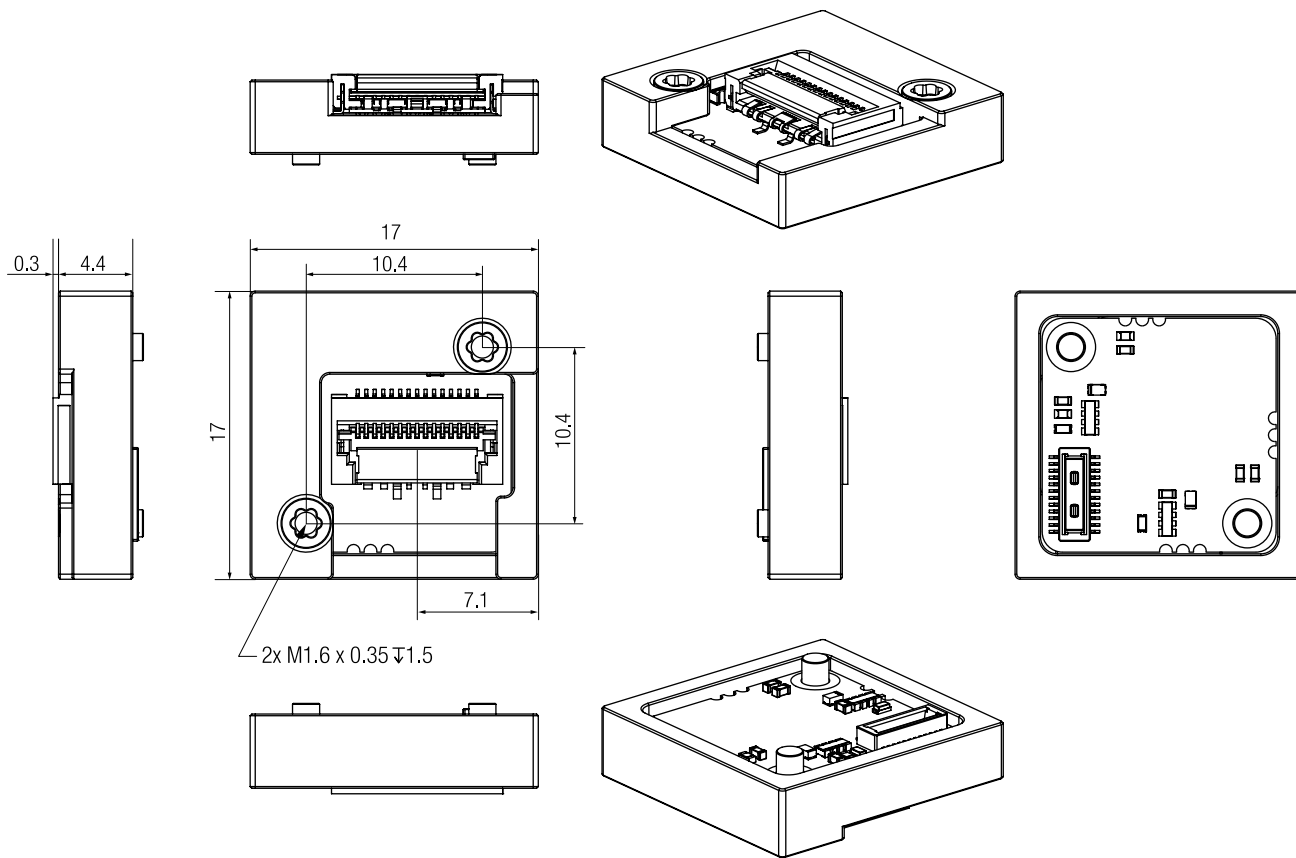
Dimensional drawing of ADPT-MU-17X17-CX3-FL
